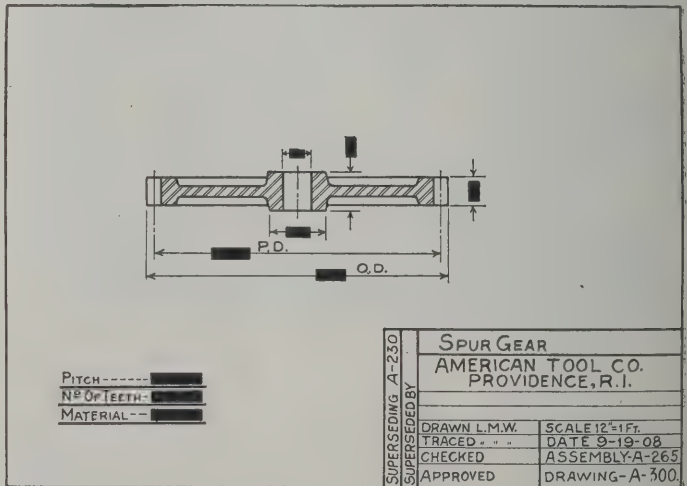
Printed Sheet with Representation of Commonly used Part and Blank Spaces to be filled in by the Draftsman
